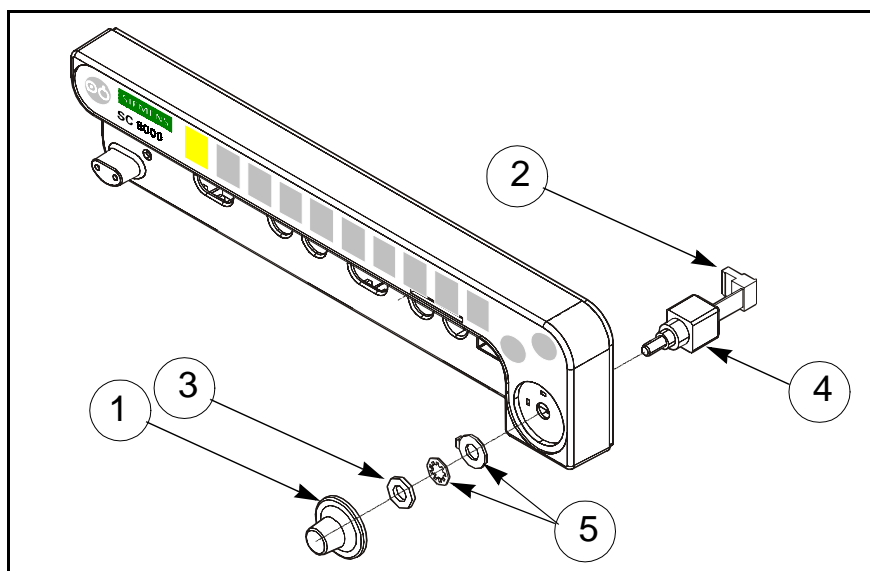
Optical Encoder Subassembly Removal/Replacement
